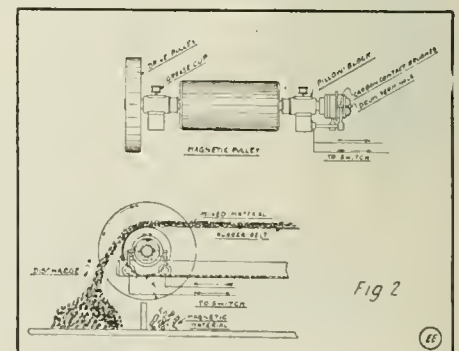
Sectional and Side Views of New Magnetic Separator Pulley.
